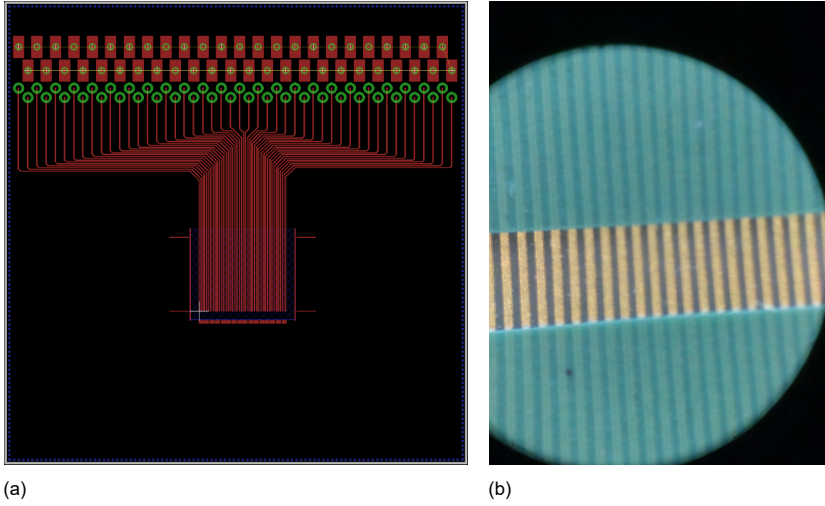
(a) Schematic view of the designed PCB for the dual frequency probe, (b) a view on the manufactured PCB traces.
